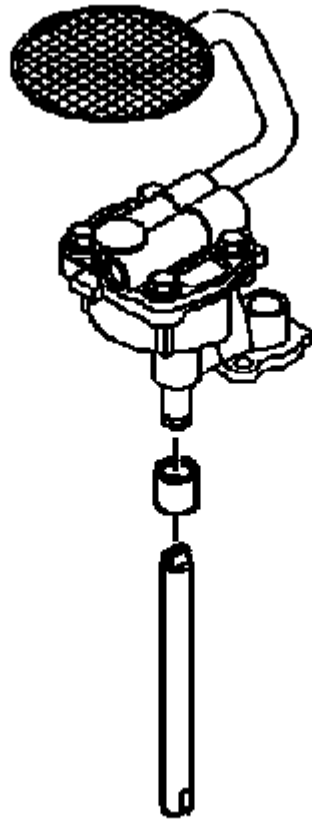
View Of Oil Pump Driveshaft & Oil Pump Driveshaft Retainer
